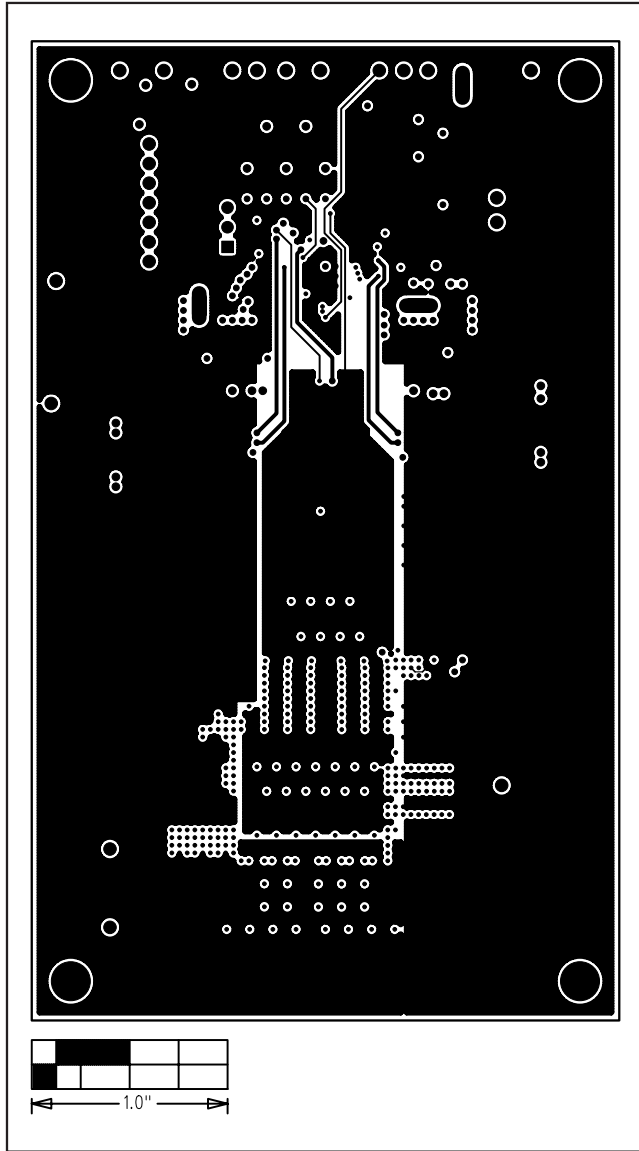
MAX17082 EV Kit PCB Layout —Internal Layer 6 (Signal Layer)
